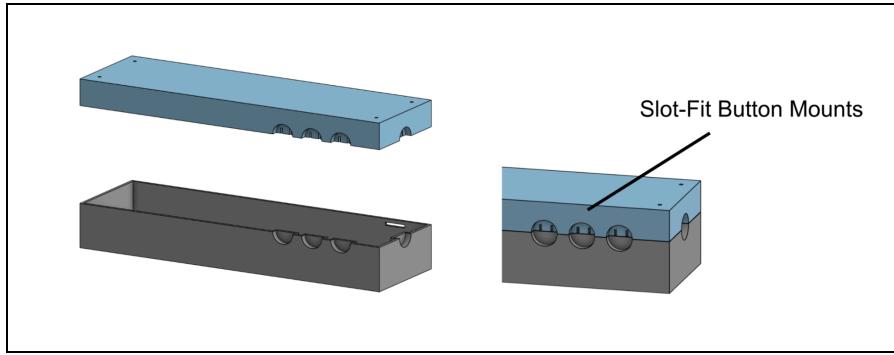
Rectangular shell design with slot-fit button mounting. Pieces not assembled (left). Assembled (right).
